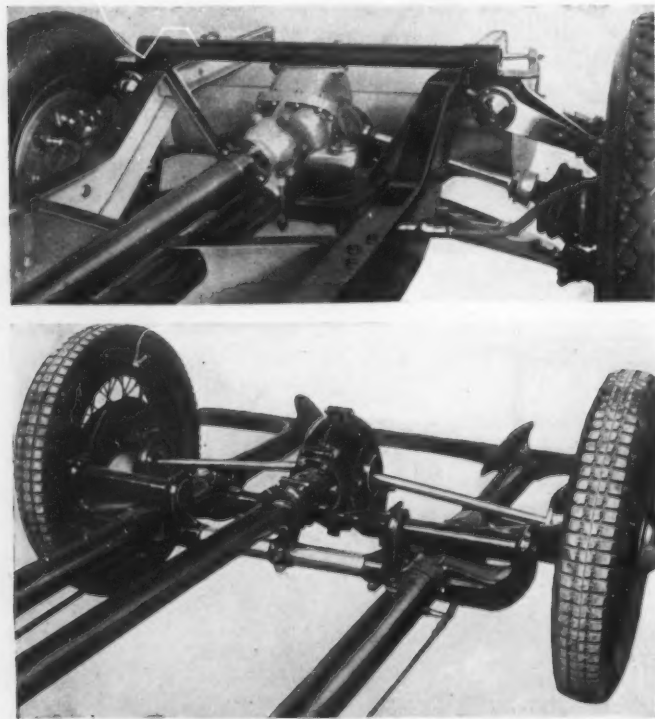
TWO DESIGNS OF INDEPENDENTLY SPRUNG REAR-WHEEL CHASSIS-CONSTRUCTION
